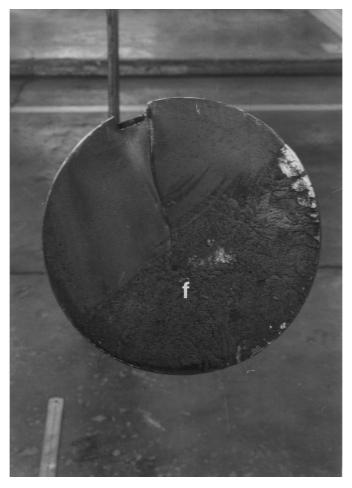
Fatigue failure initiating at a keyway root radius.
